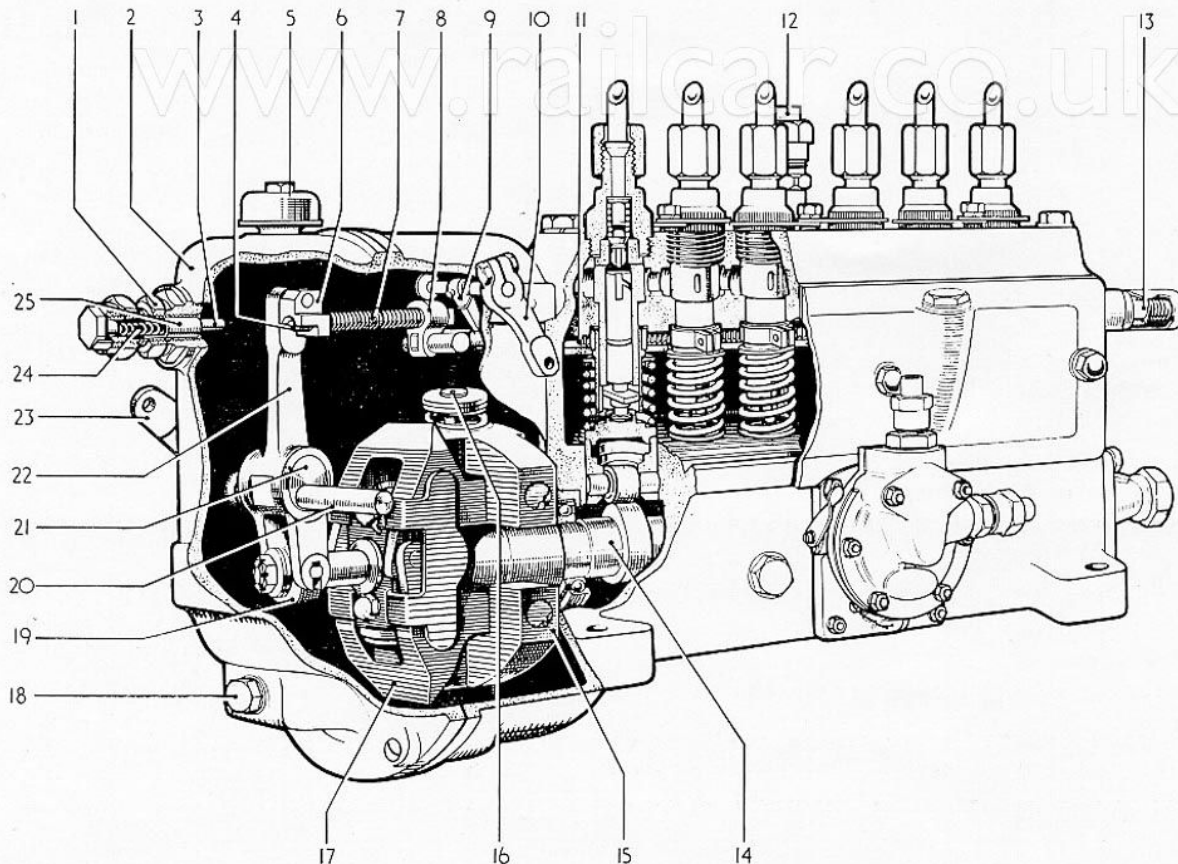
CUT-AWAY VIEW OF GOVERNOR
